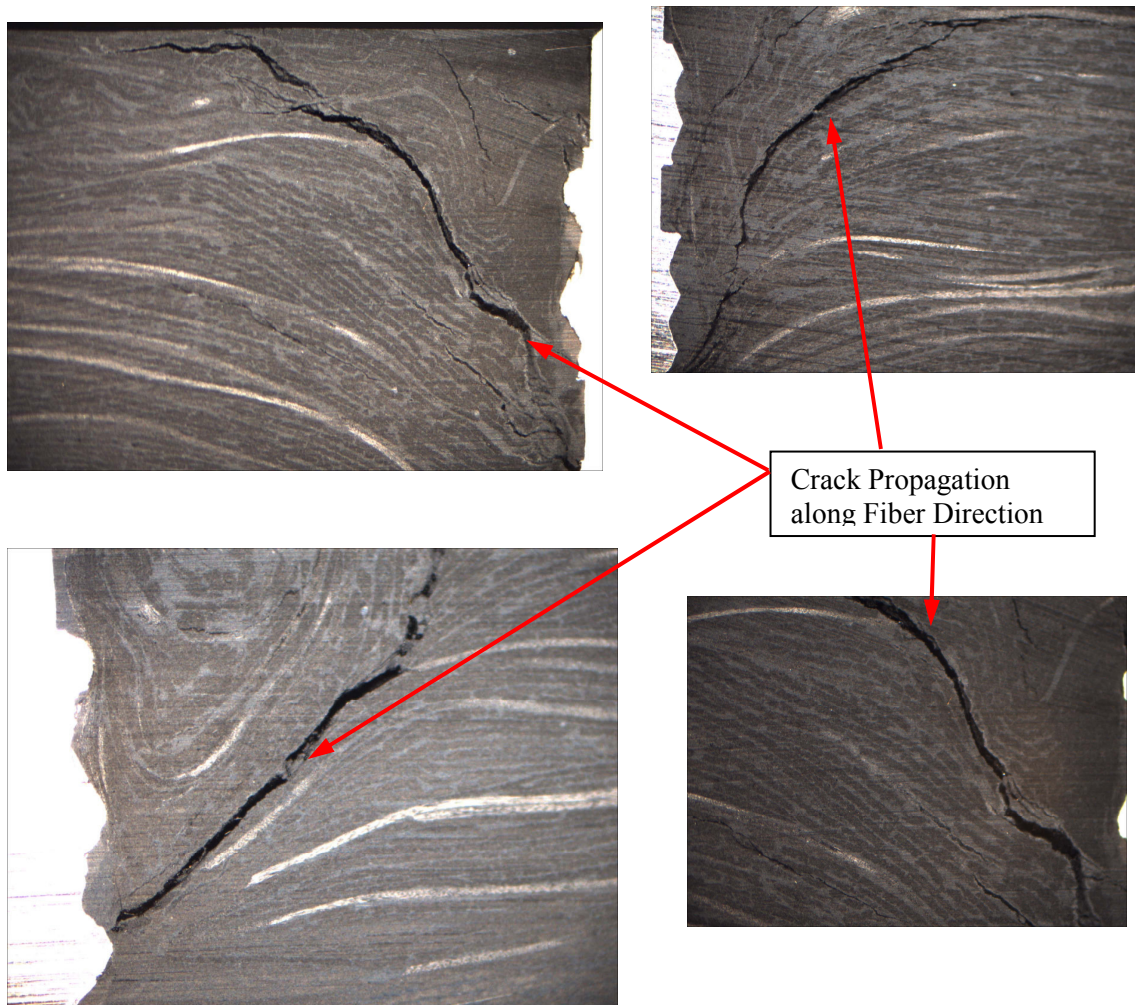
Microscopic Fracture Photograph of Co-Molded Insert
